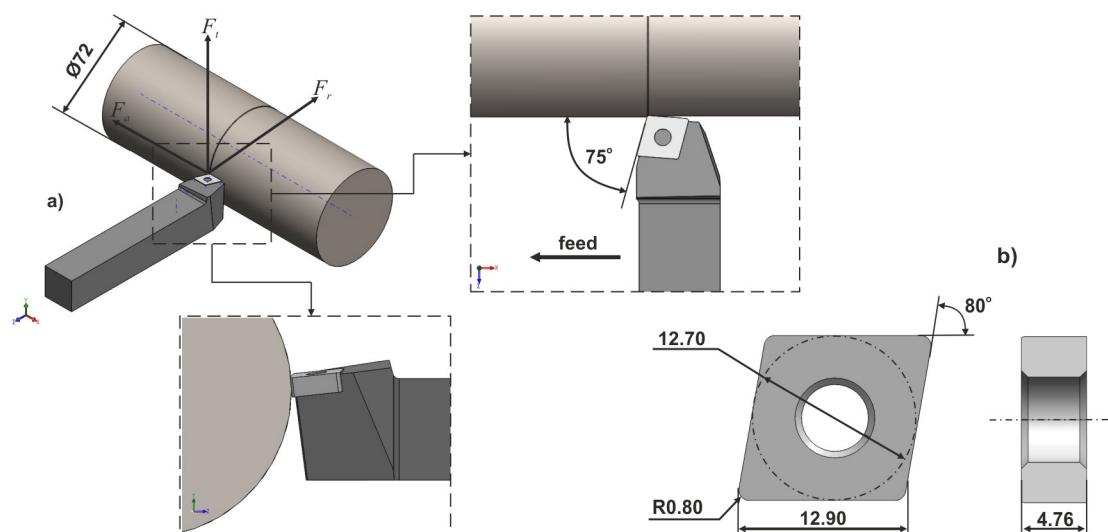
CAD models of a) the cylindrical workpiece, and b) the CNGA120408 insert
